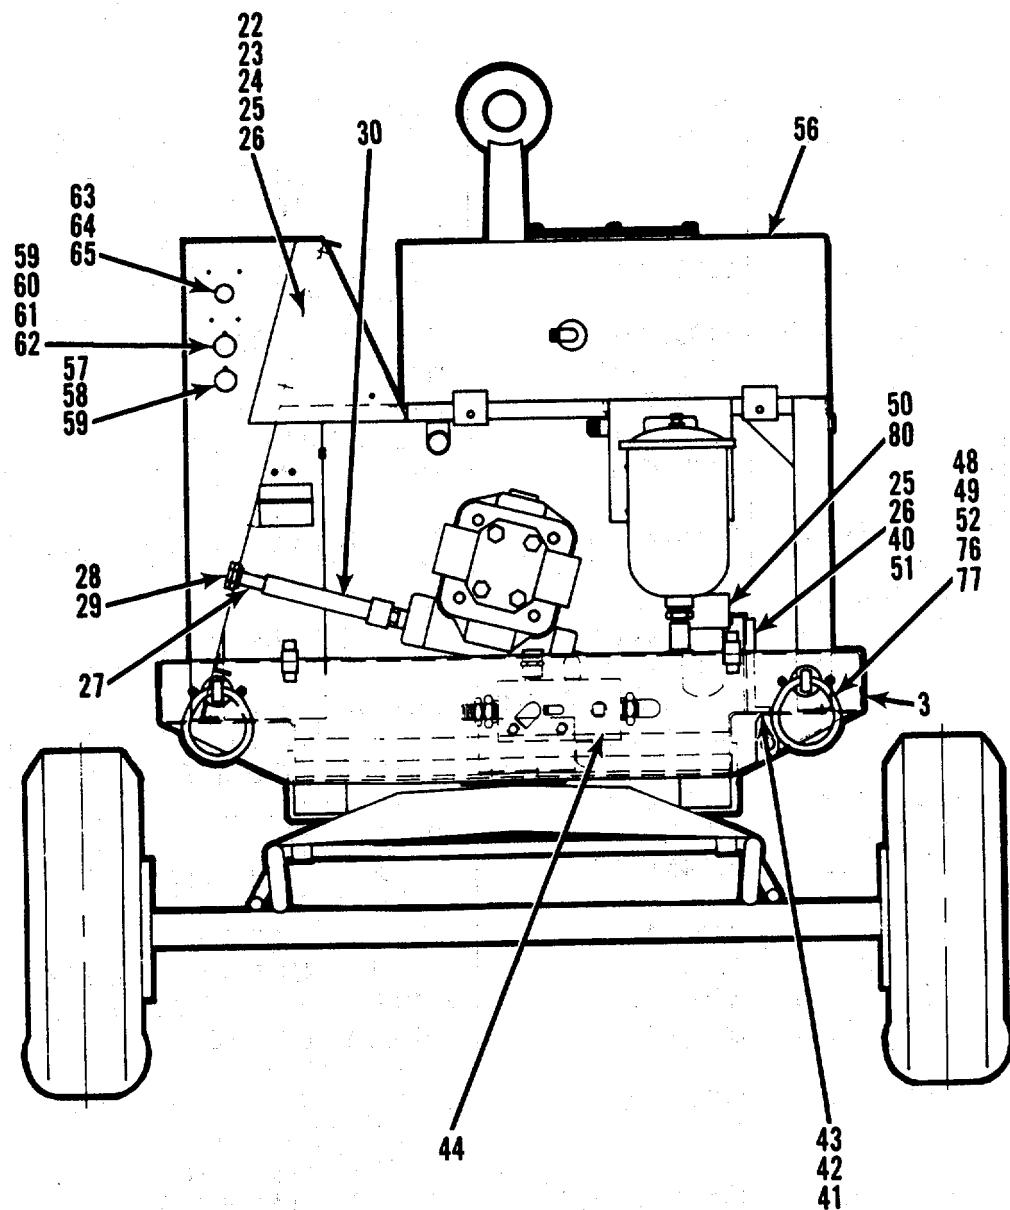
Internal Components Assembly, D-6A (Sheet 3 of 3)
